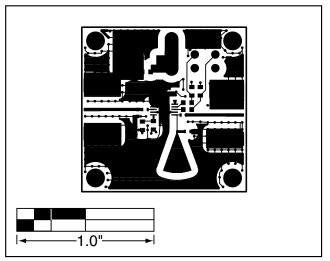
MAX2645 EV Kit PC Board Layout—Component Side
